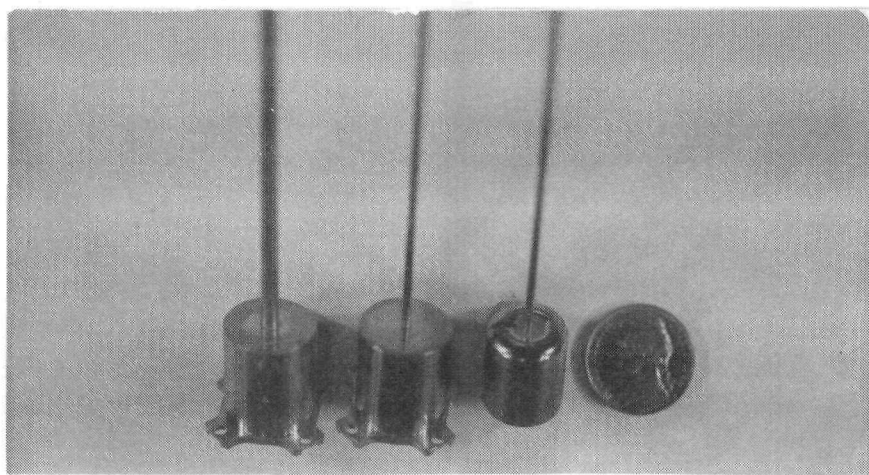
Inner and Outer Capsules with Inner and Outer Tubes Attached
